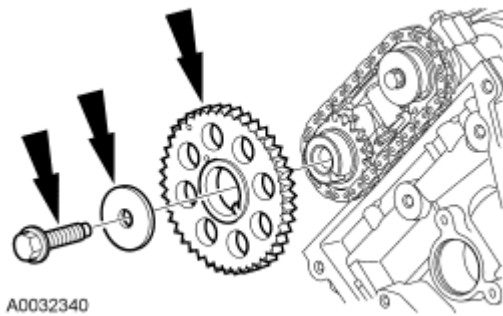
Identifying Camshaft Sprocket, Washer & Bolt
